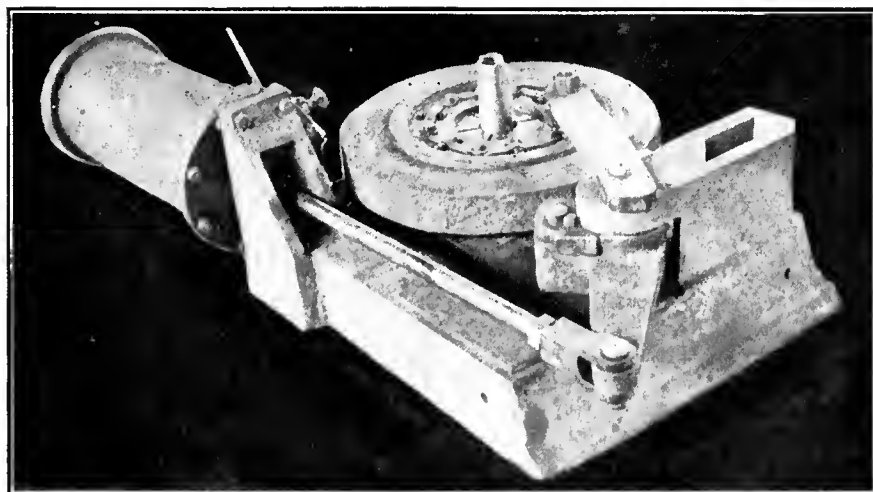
JENCKES MACHINE CO. BANDING PRESS.
